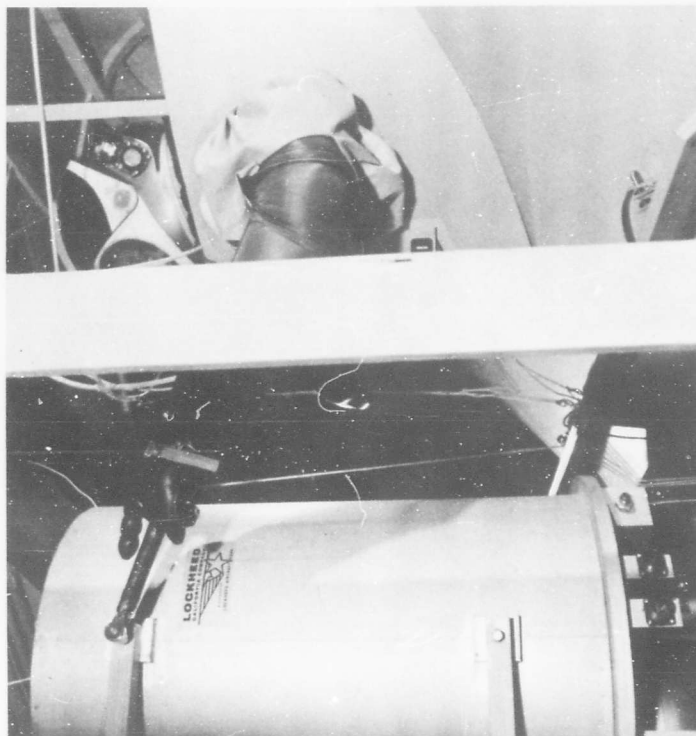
ACCESS TO FUEL CELL MOUNTING BOLTS WITH SLEEVES
